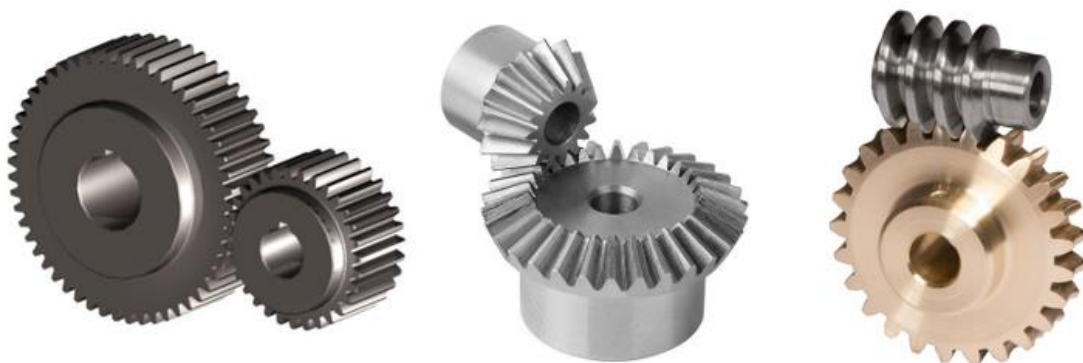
Types of Gears, from left to right: Spur Gear, Bevel and Worm Gear
